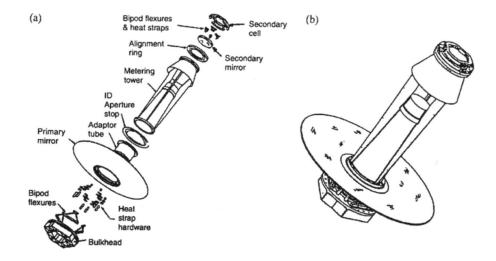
(a) Exploded view of the optical components of the Spitzer Space telescope. (b) The assembled telescope optics. (From Chaney et $al.^{30}$)
